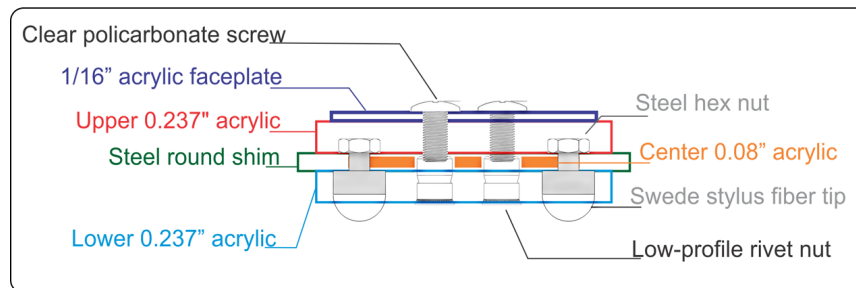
Parts which compose a Laser cut dial. *The laser cut dial is composed of nine distinct parts, and 17 parts in total.
